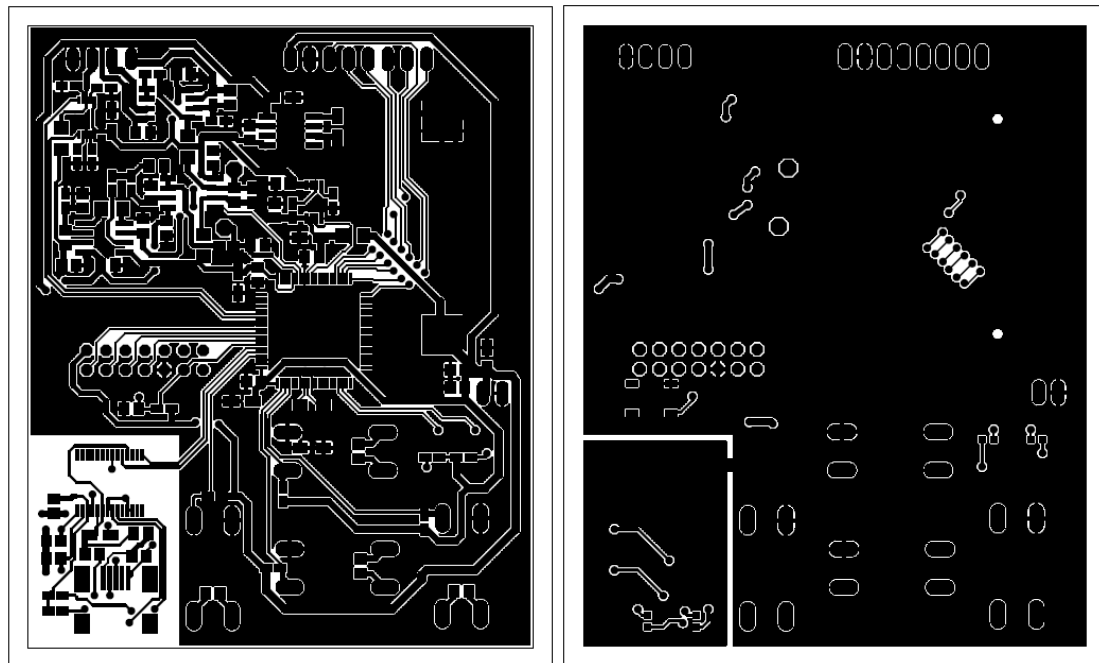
Top copper (left) and bottom copper (right) layer of the system PCB layout.
